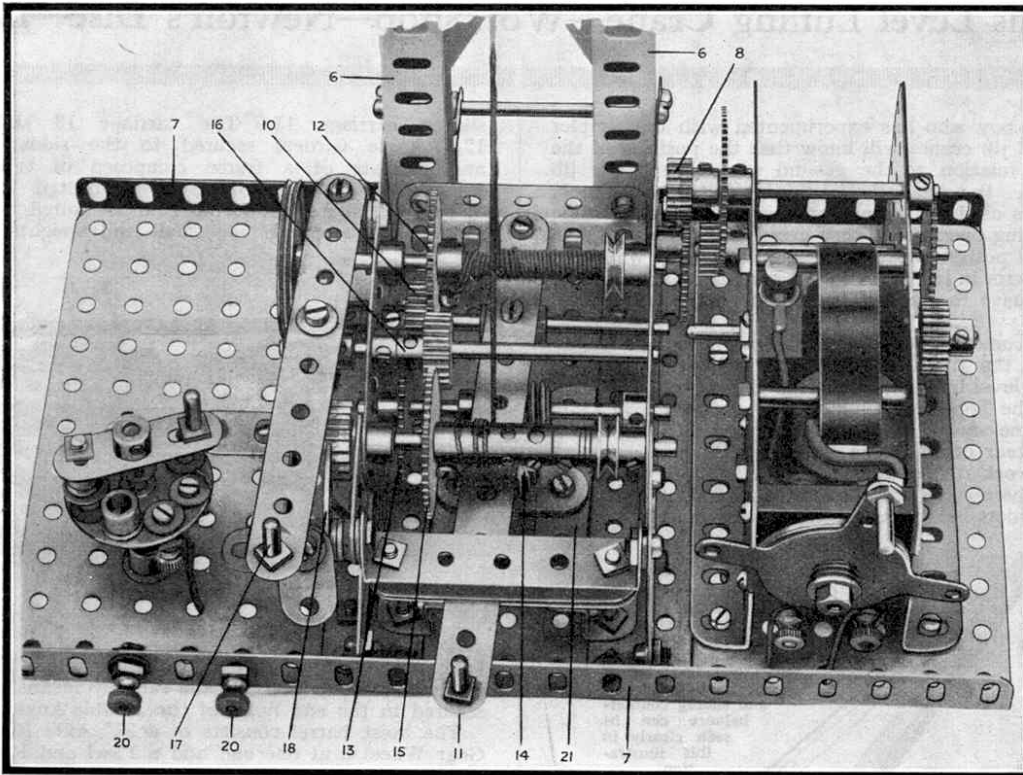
Partial plan view of Gear-Box showing layout of Gears, Electric Motor, Controller, etc.
